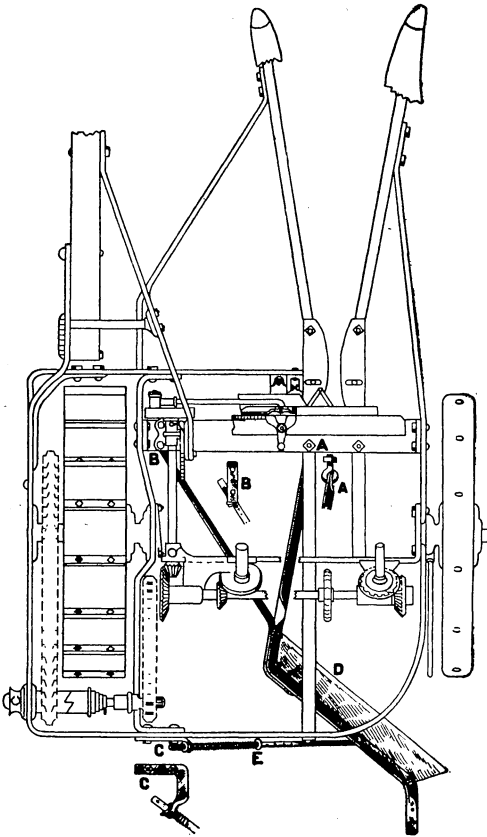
Corn-stubble cutter, attached to corn harvester.
